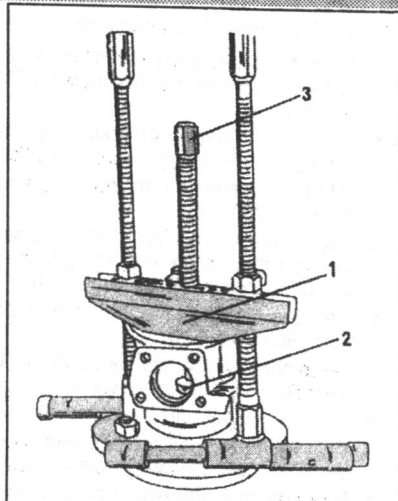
A wheel hub can be removed with a puller (1). Place thrust washer (2) over the wheel hub face. The spindle (3) is tightened to push out the hub.
